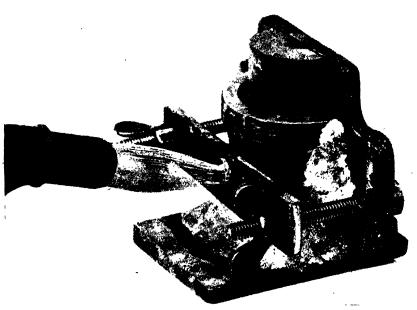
Preheating of shell clamped in jig (Hoyt Metal Co., Ltd.)
